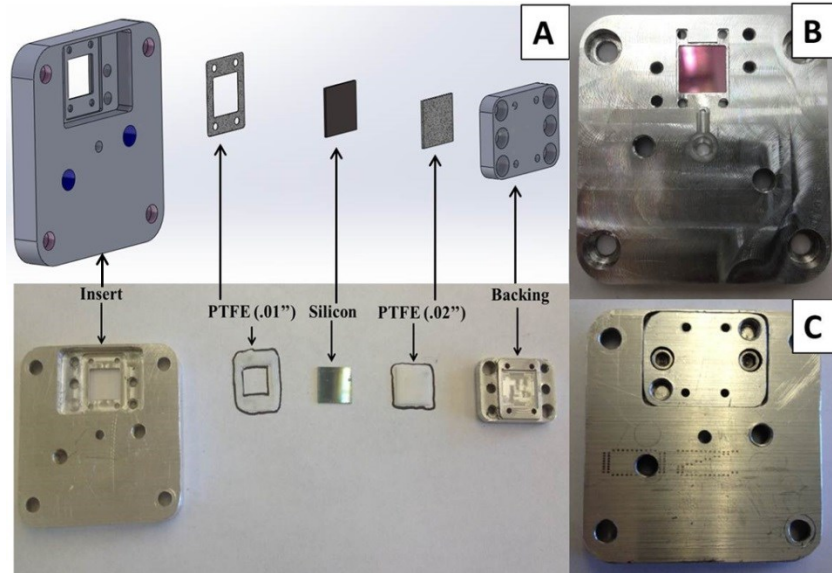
Modified aluminum assembly to include silicon clamp design. CAD representation and digital image of exploded assembly (A) and digital images of the front (B) and back (C) of the assembled insert are shown.
